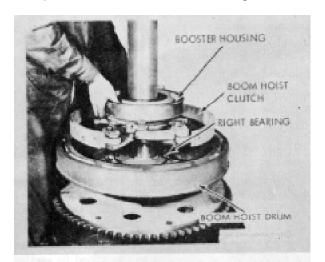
Front drum shaft assembly (right side) (sheet 1 of 2).
